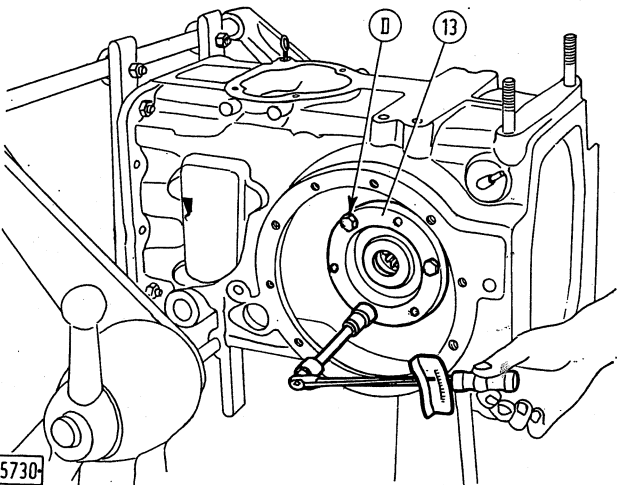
Tightening the screws (D) with the torque wrench A 711041/2 to check the bearing setting.
